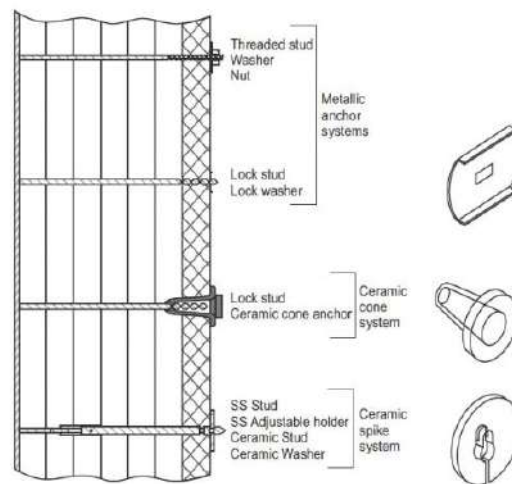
Typical Layered Fiber Lining Anchoring Systems
